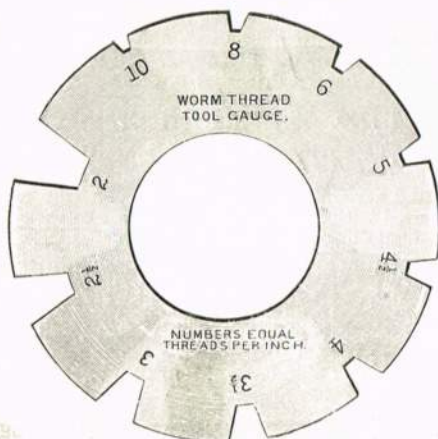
(No. 720.) Worm Thread Tool Gauge.
